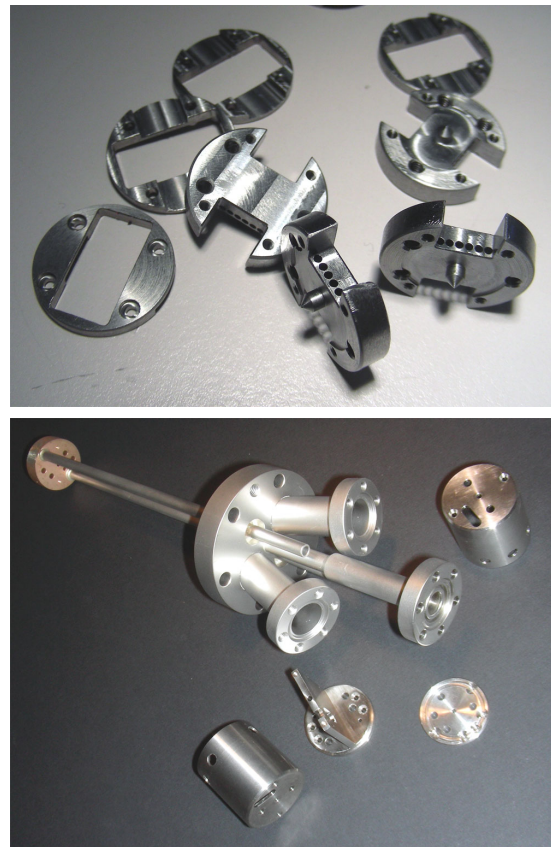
Parts of a sample holder made out of molybdenum and stainless steel. The lower picture shows a custom-made evaporator.
